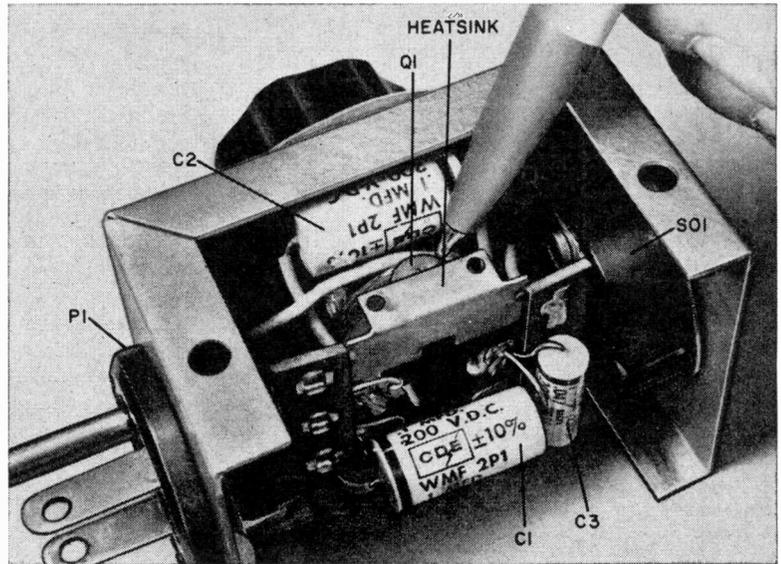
Once Q1 is properly soldered to heatsink according to directions, set heatsink tabs onto lugs of terminal strip; solder in place.
